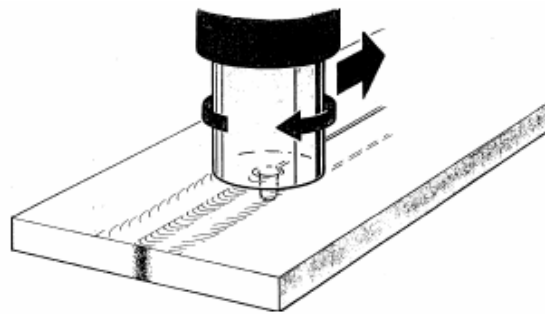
Schematic representation of friction stir welding [16].
